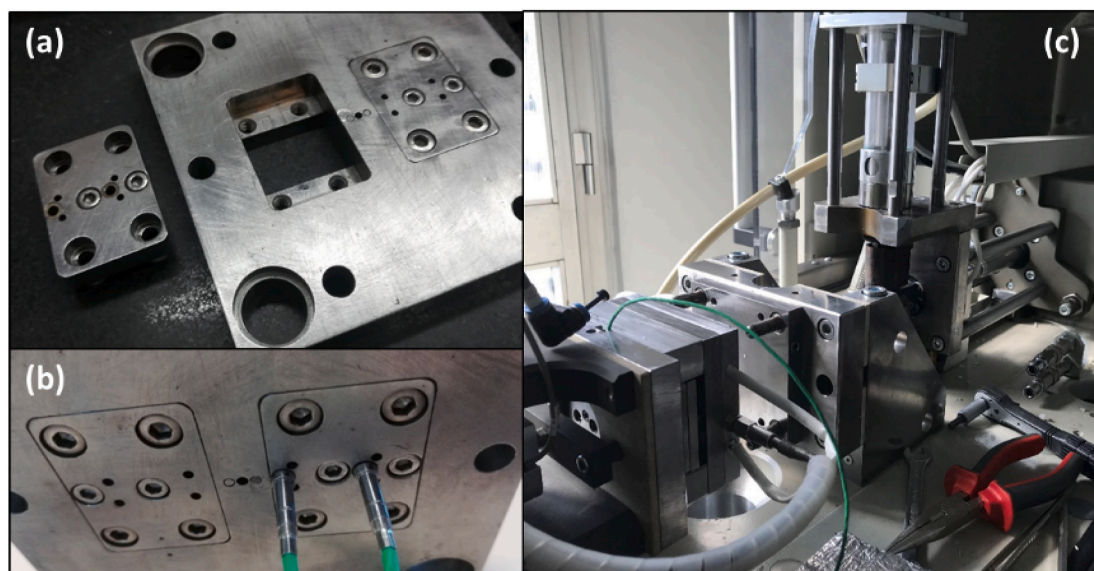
Overview of the: a) assembly phase of the rheometer insert in the main plate of the master mould; b) sensor installation and c) complete master mould with sensor system mounted on the micro injection moulding machine.
